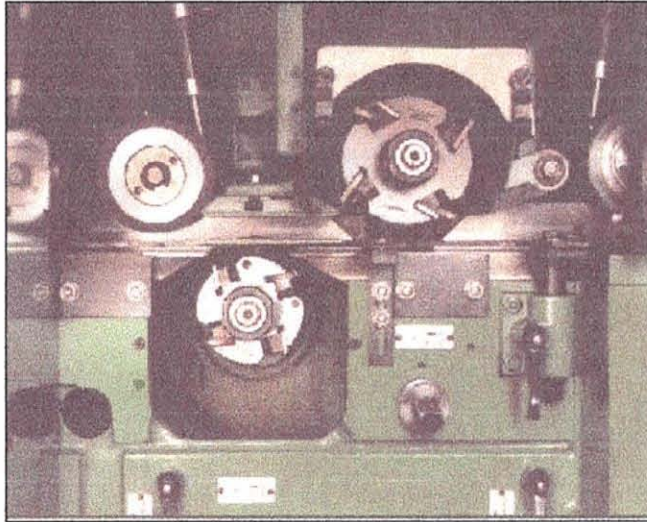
Cutterhead arrangement for modern planing machine
